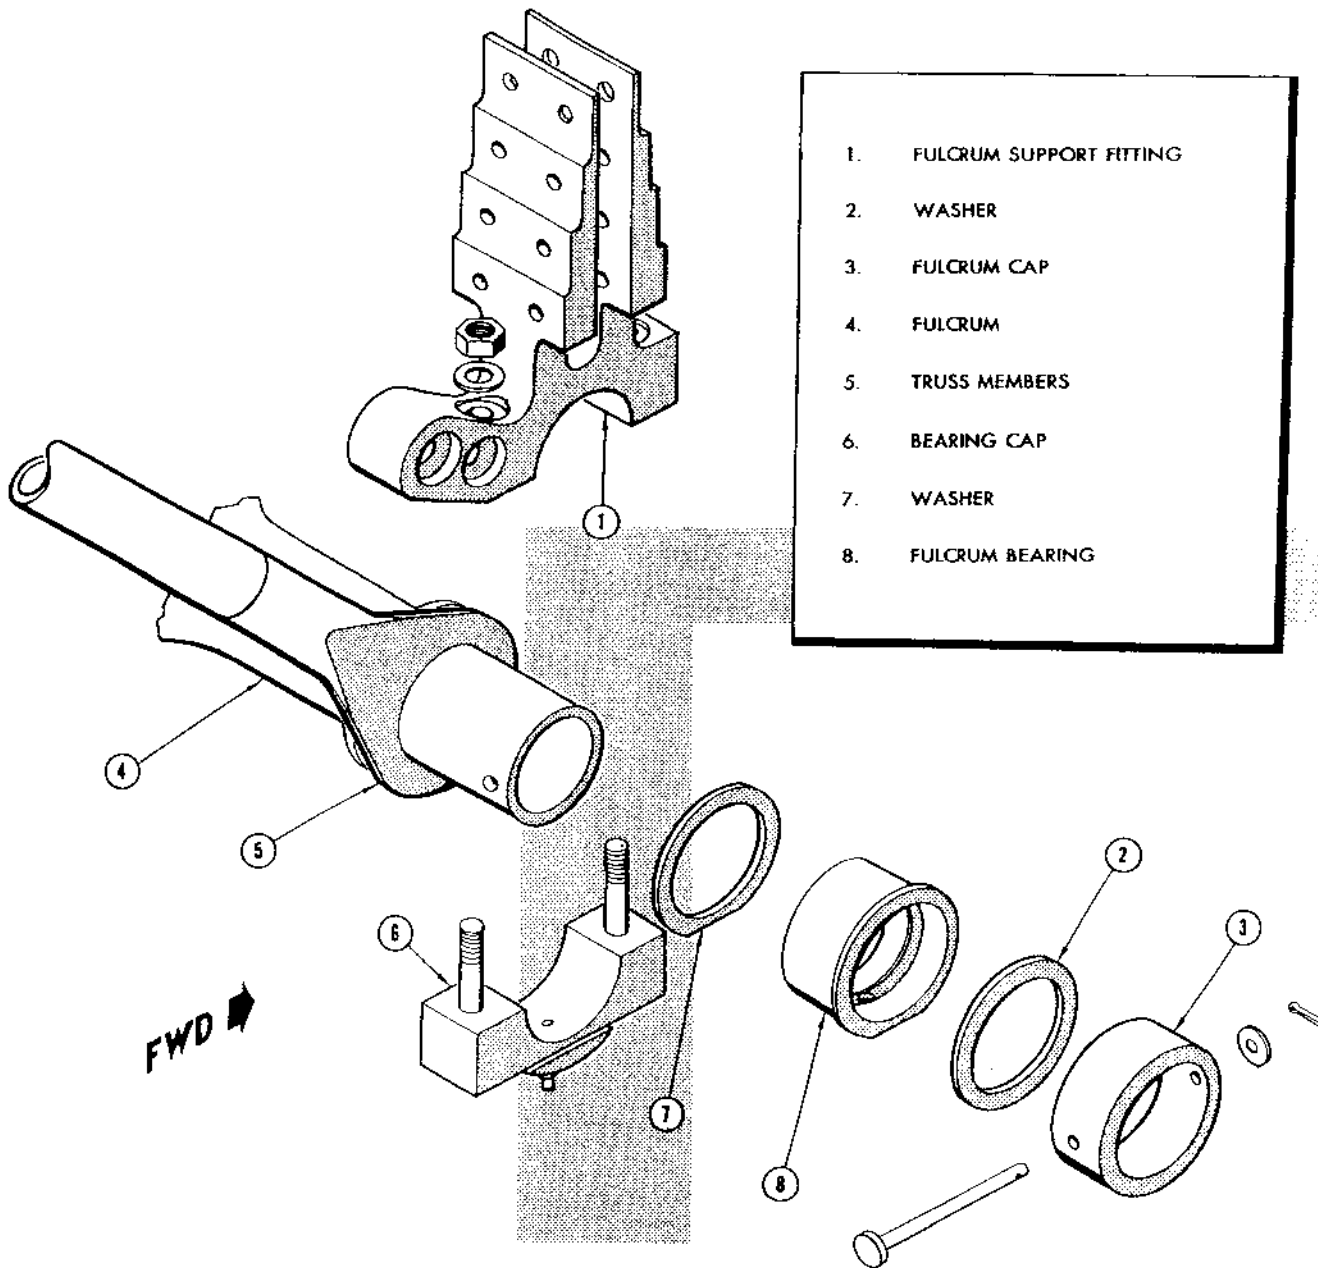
Nose Gear Fulcrum Bearing Cap Removal
